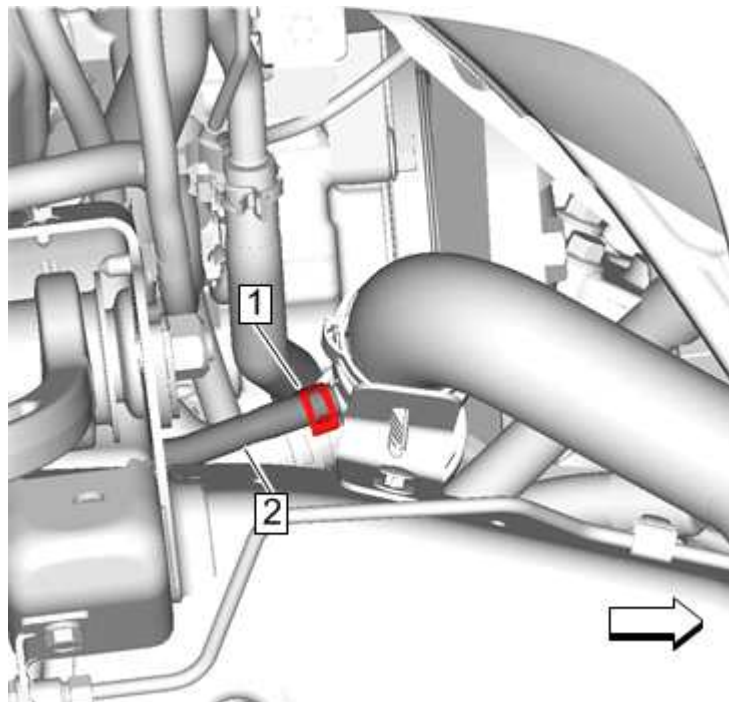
Emission Reduction Fluid Injector Outlet Hose And Radiator Outlet Hose
